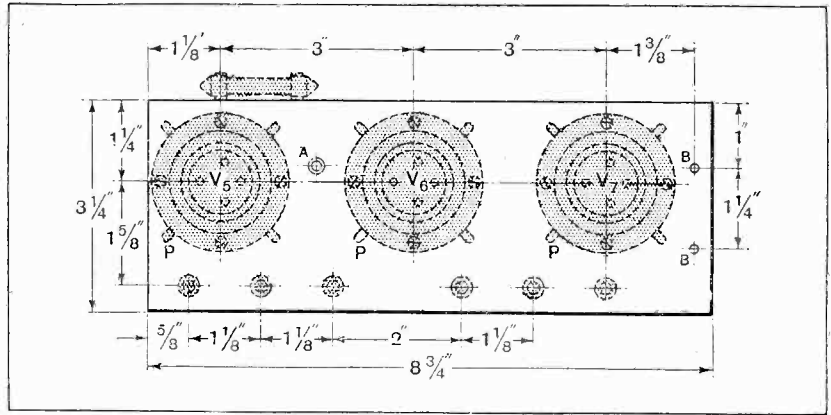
Constructional details showing drilling and assembly of the valve platform. Holes should be made at the side of each terminal tag.
